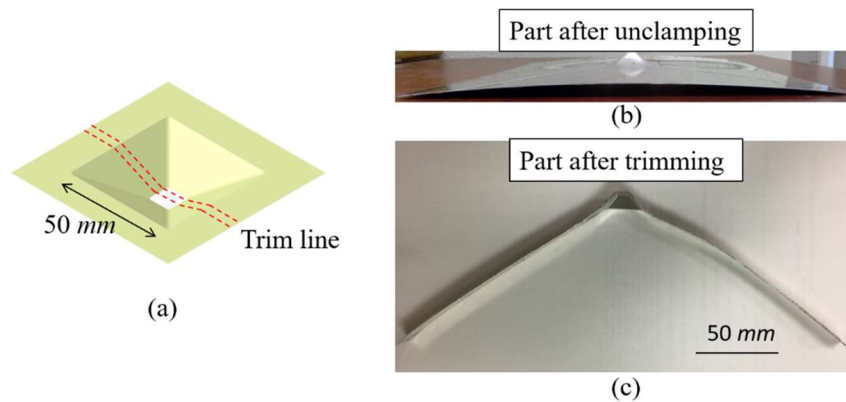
The geometry of the part from: (a) design; (b) unclamping; (c) trimming
